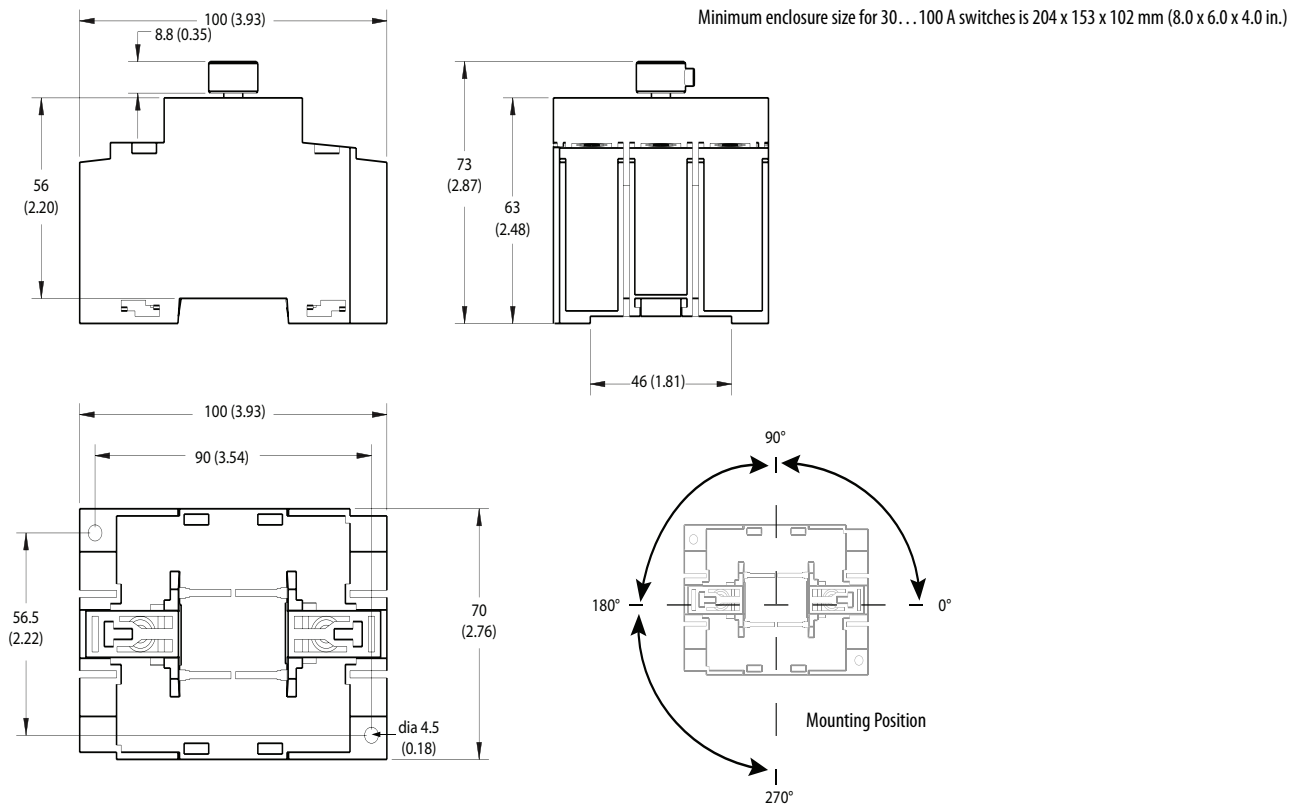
30, 60, and 100 A Door-mounted Switches, 3- and 4-pole Devices
